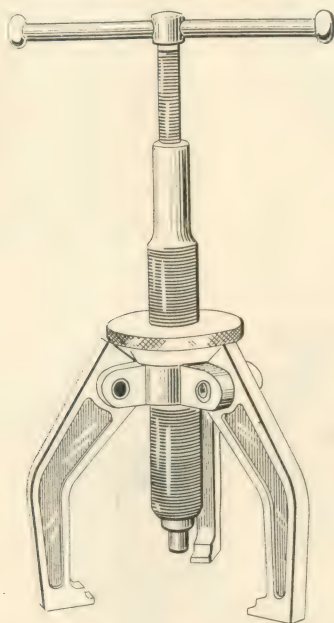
A USEFUL GEAR WITHDRAWAL TOOL
